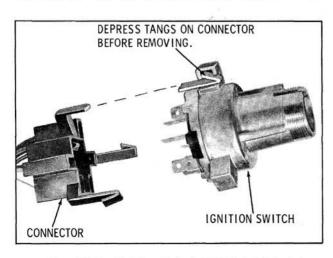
Ignition Switch (30-31 & 32 Series)
